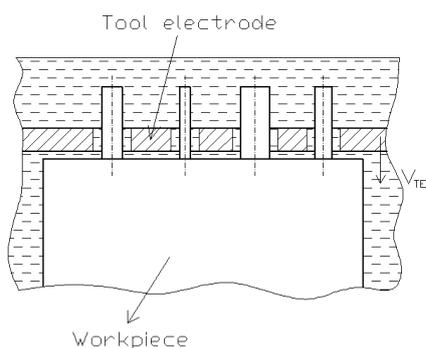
Machining scheme applied in order to obtain small diameter cylindrical surfaces by means of a plate tool electrode
